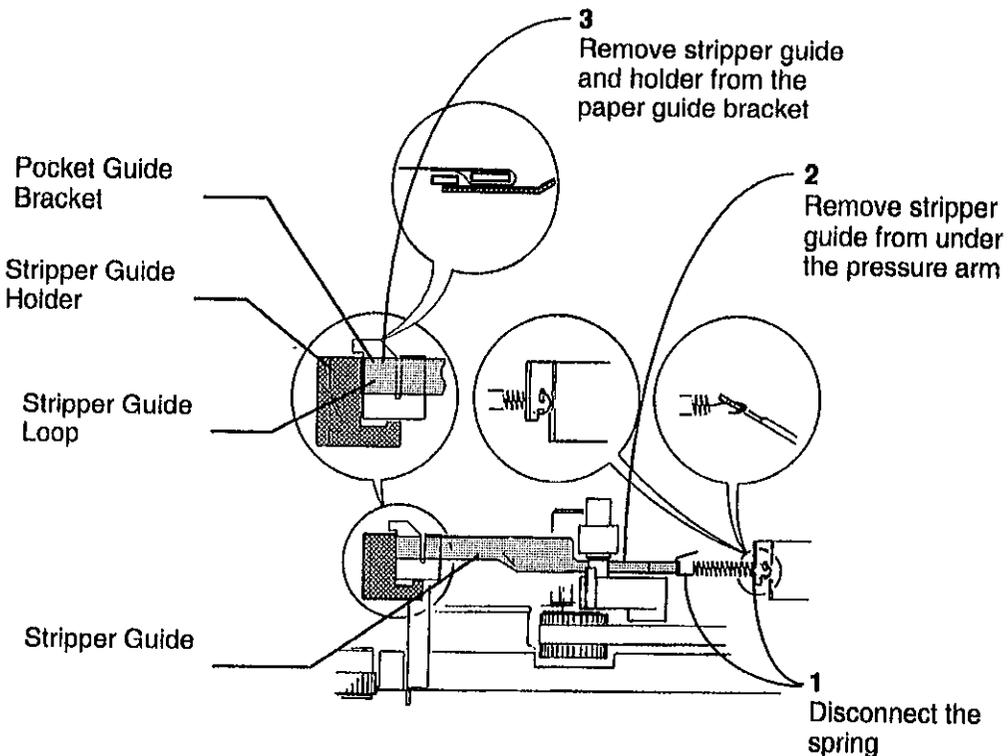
Removing the Stripper Guide and the Stripper Guide Holder
